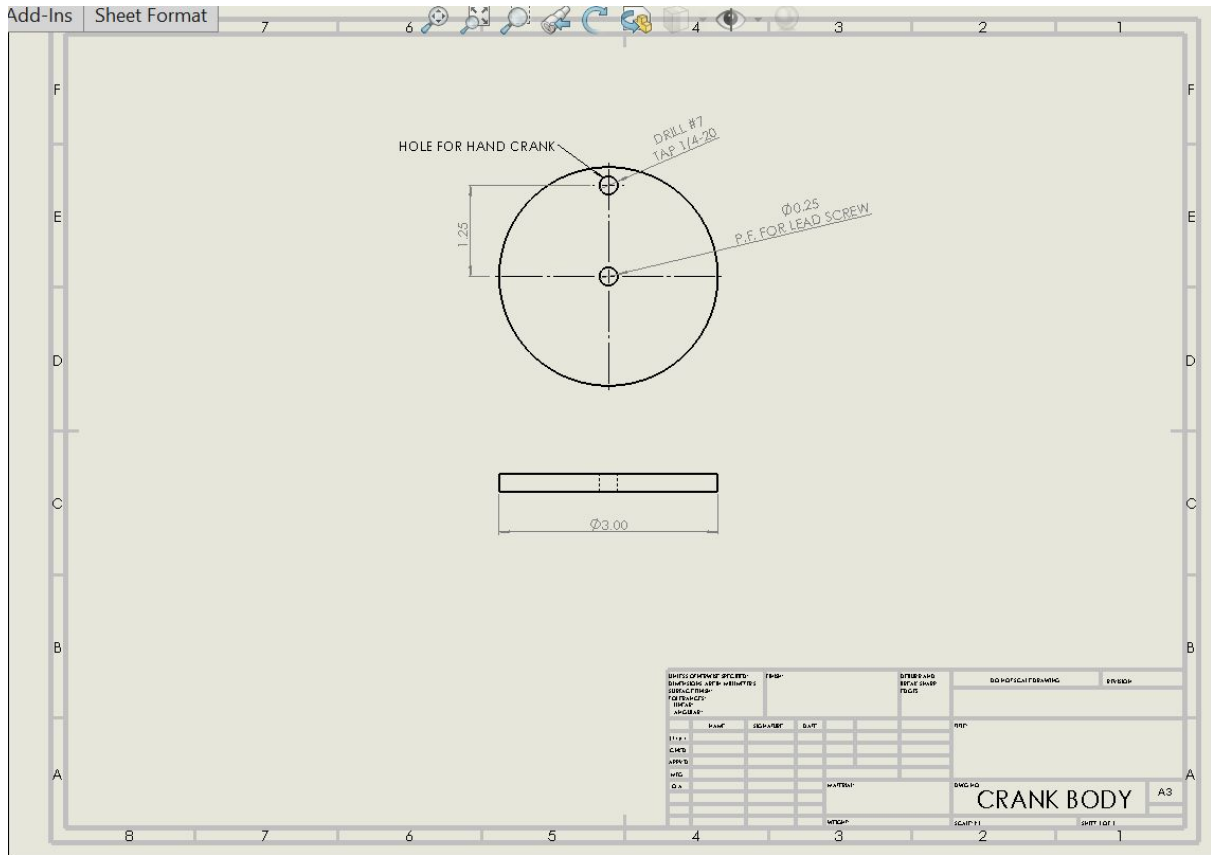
Preliminary Design Crank Body Detail Drawing
